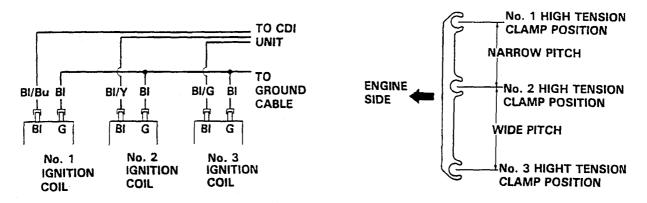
Ignition coil connections Fig. 16-19 Spark plug (H.T.) lead clamps
